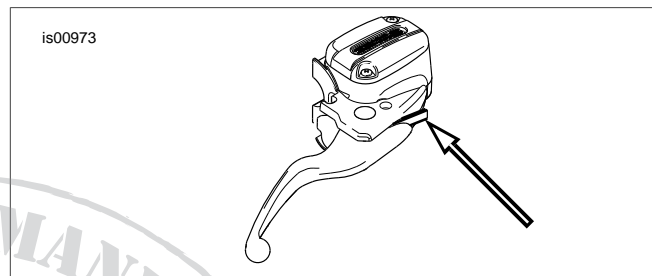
Cardboard Insert - 4 mm (5/32 in.)
